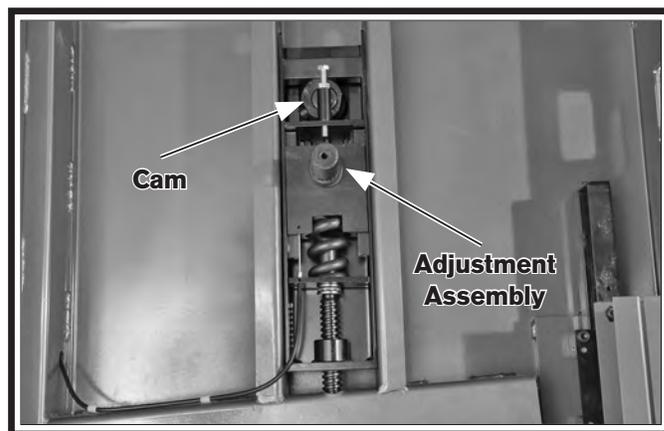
Lubrication locations for tension adjustment assembly (upper wheel removed for clarity).
